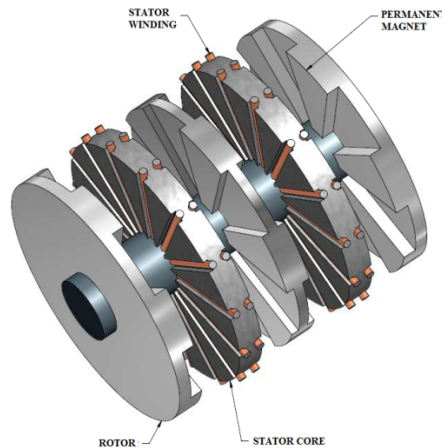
Multi-Stator-Multi-Rotor Axial Flux Permanent Magnet Machine
